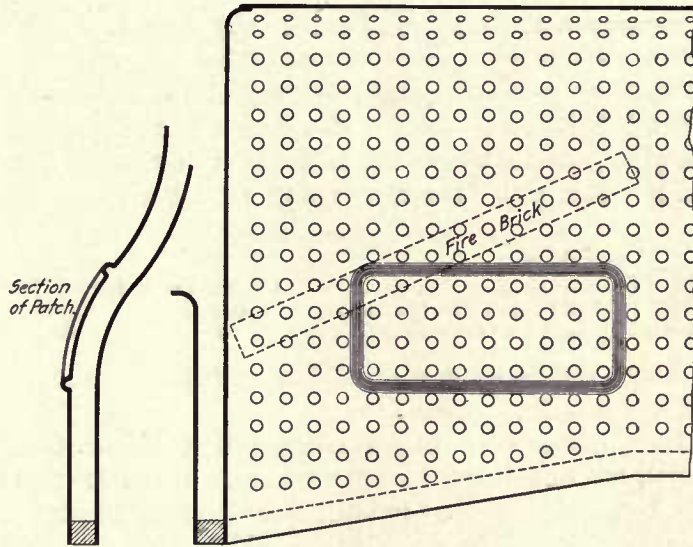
Showing Patch Welded on Firebox Before U Was Hammered Down.
